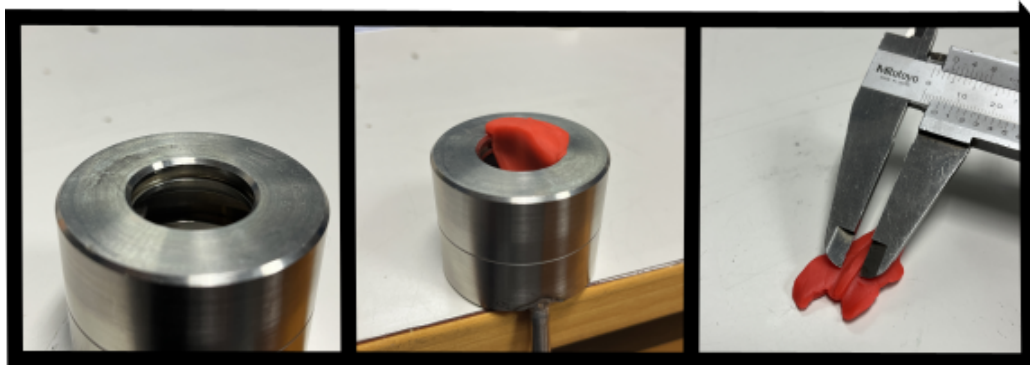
Indirect measurement of o-ring groove dimensions.
